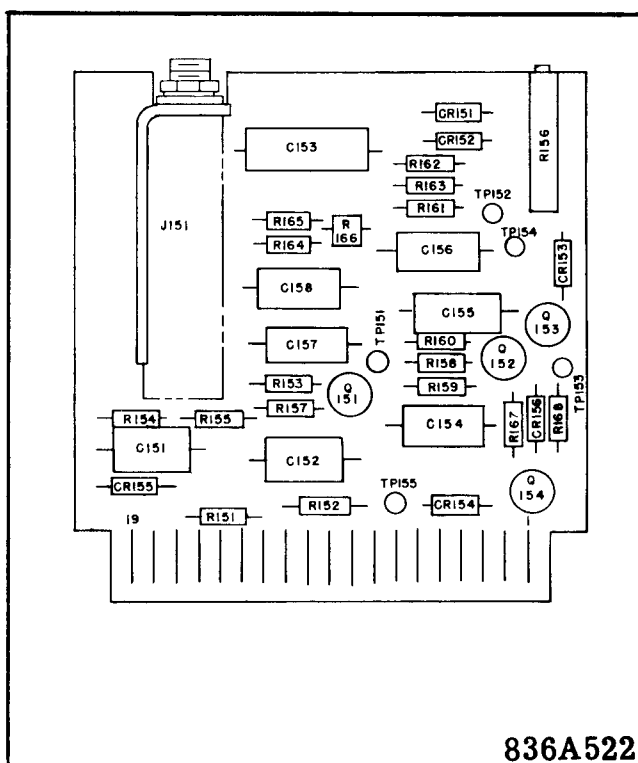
Component locations on the carrier level indicator printed circuit board.
